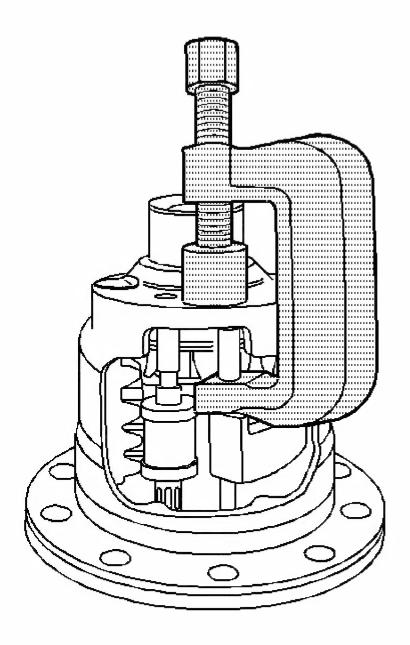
Removing Latching Bracket Bushing Courtesy of GENERAL MOTORS CORP.
